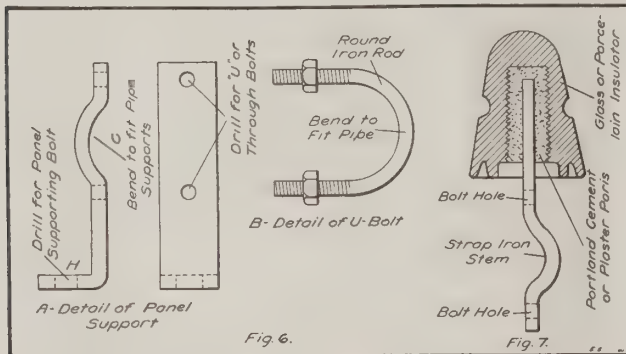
PANEL SUPPORT AND U-BOLT. FIG. 7. STRAP IRON STEM CONNECTED IN INSULATOR.
